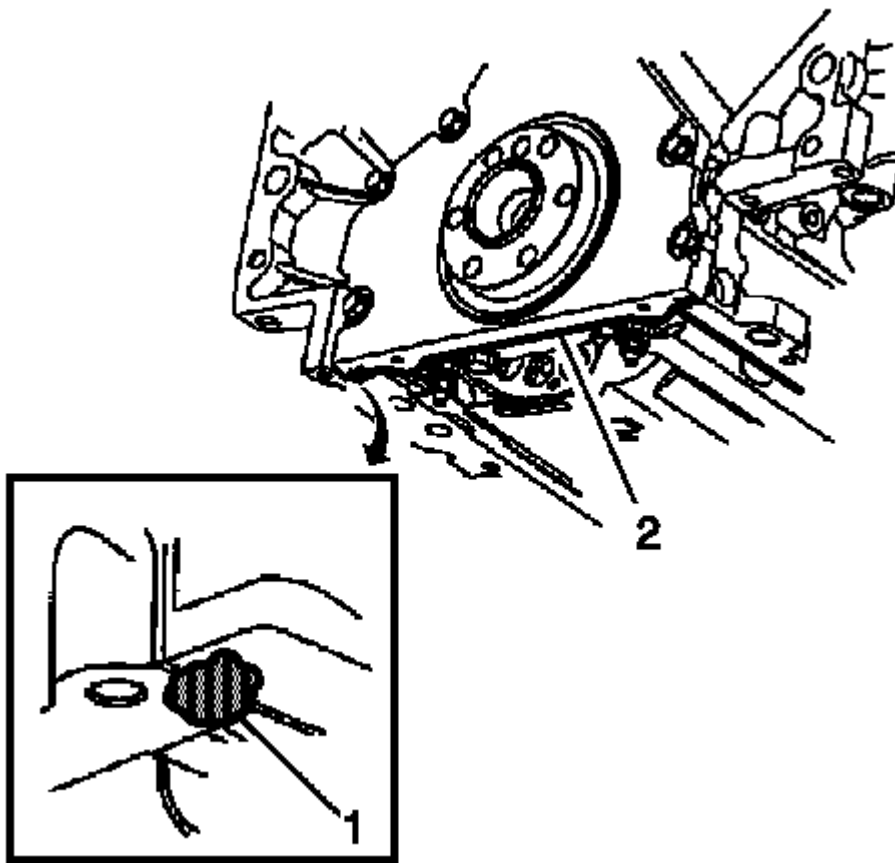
View Of Sealant Applied To Rear Oil Pan-To-Engine Block Junction
